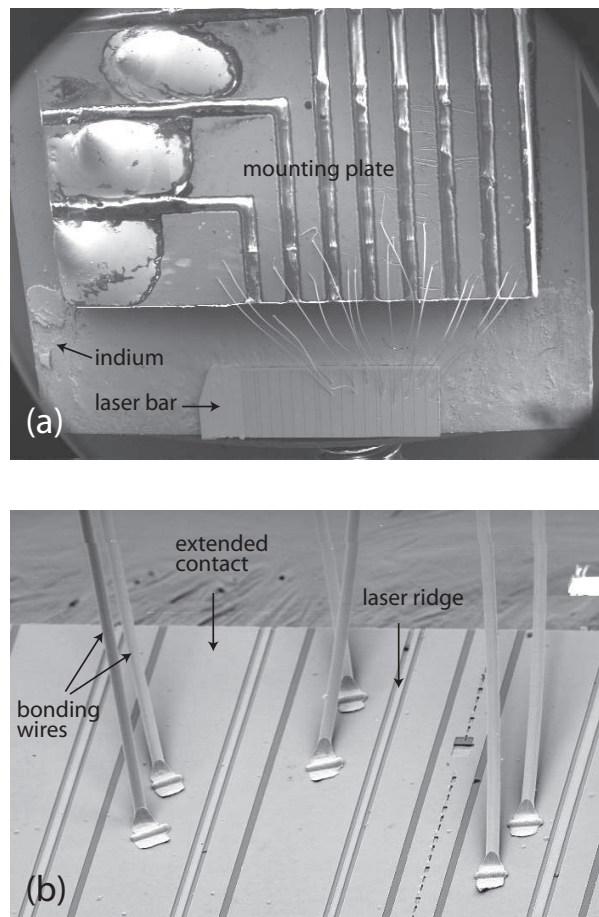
(a) The laser bar is soldered with indium to the copper mounting plate. (b) SEM close-up of the wire bonded laser ridges.
